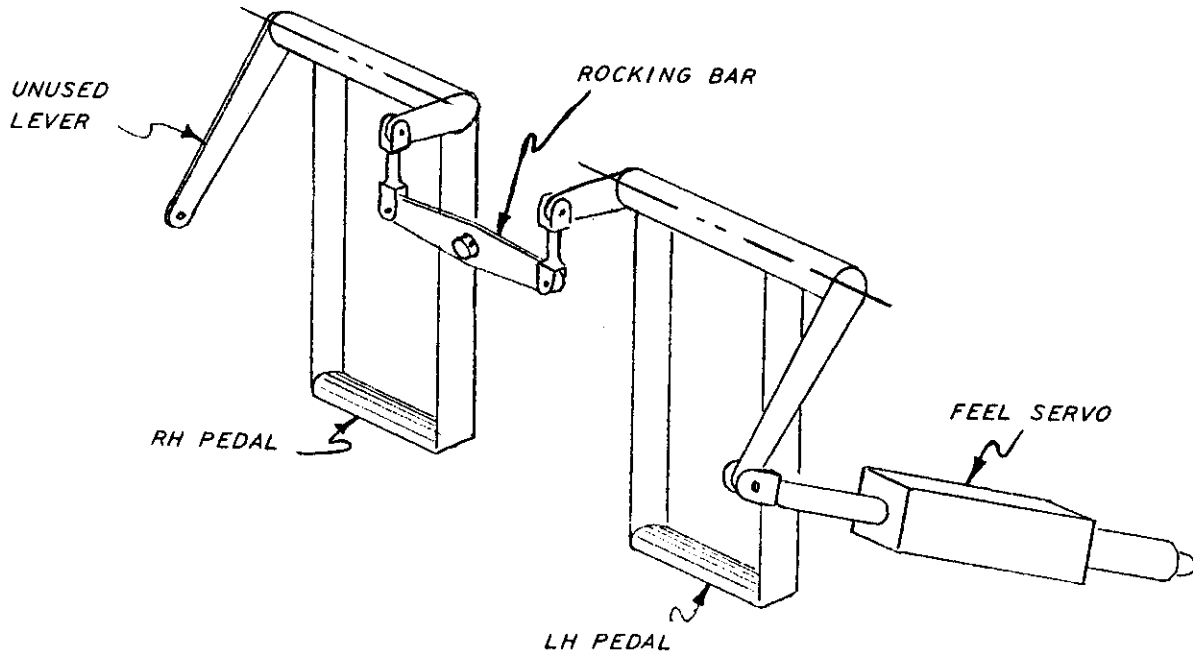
FRONT COCKPIT RUDDER FEEL SERVO INSTALLATION
